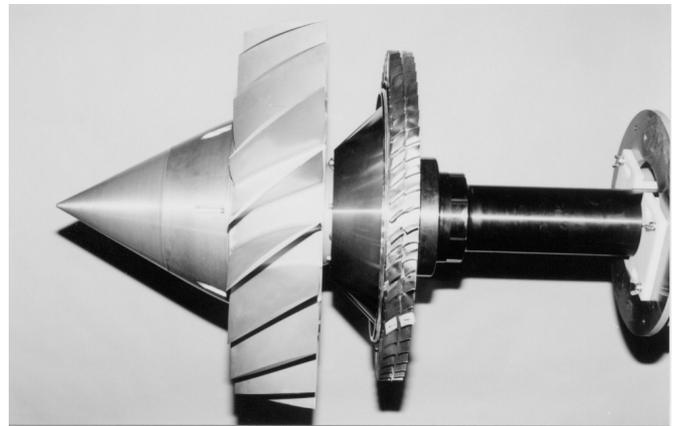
Assembly of cropped fan rotor and booster stage tandem cascade rotor
